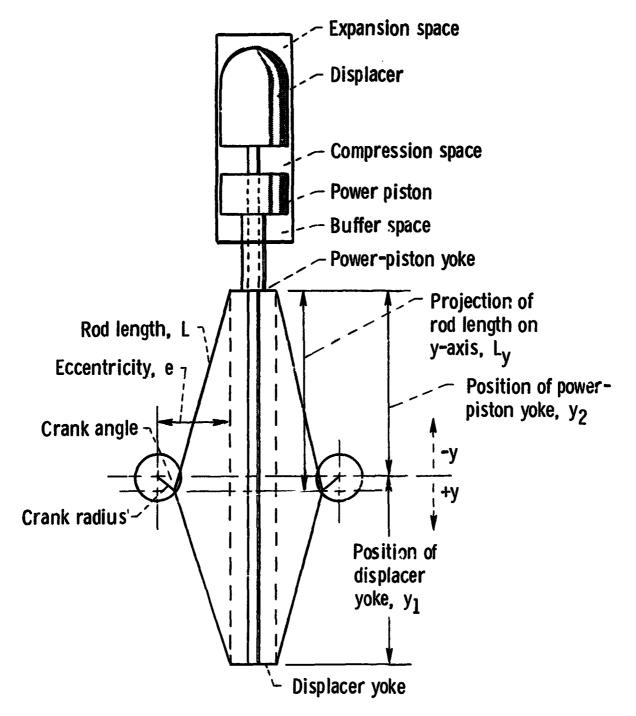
Schematic showing geometric relations between piston positions and crankshaft angle.
